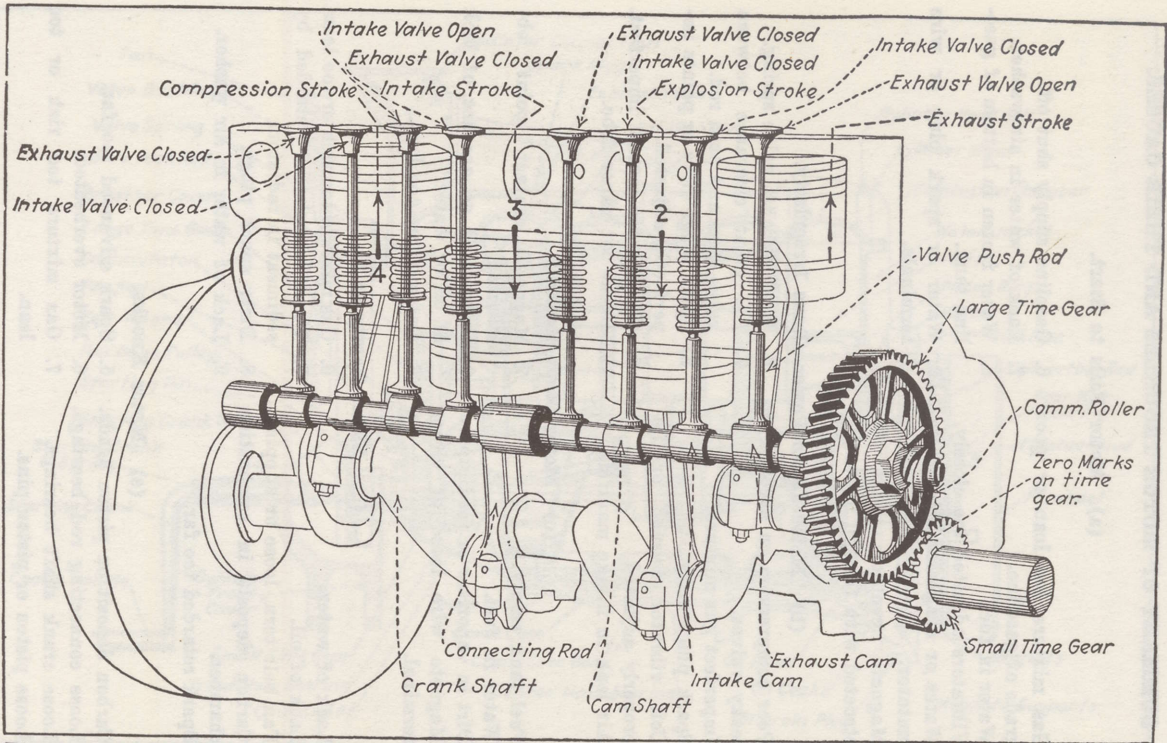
Diagram of Fordson Cylinder Assembly Showing Correct Position of the Valves with the Timing Gears Properly Set According to the Zero Marks on Gear Teeth, Also the Relative Position of Pistons in Their Strokes. The Firing Order of the Cylinders is 1, 2, 4, 3.
